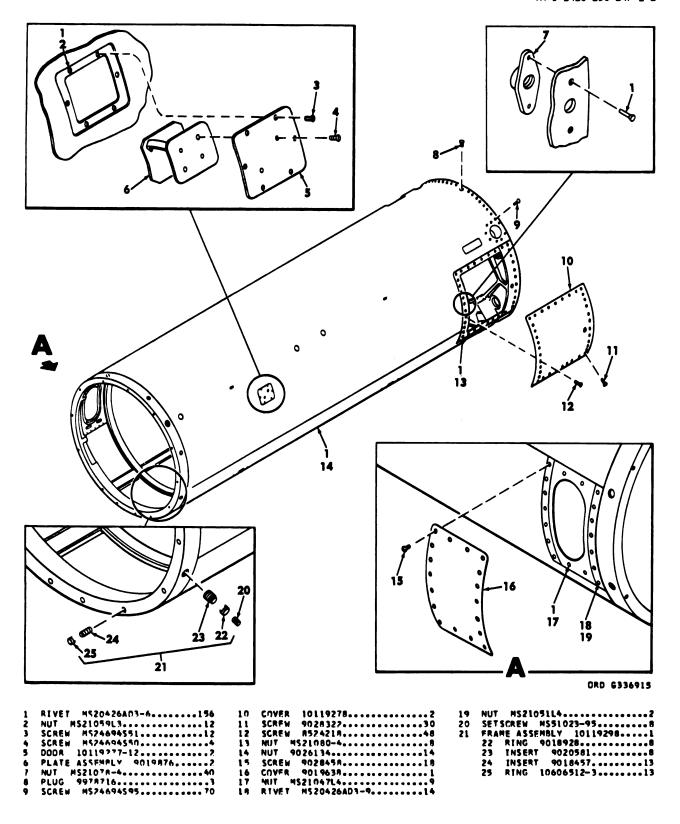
STRUCTURE ASSEMBLY, ENGINE SECTION /10119277/ /SEF FIGURE 158 FOR NEXT HIGHER ASSEMBLY/
